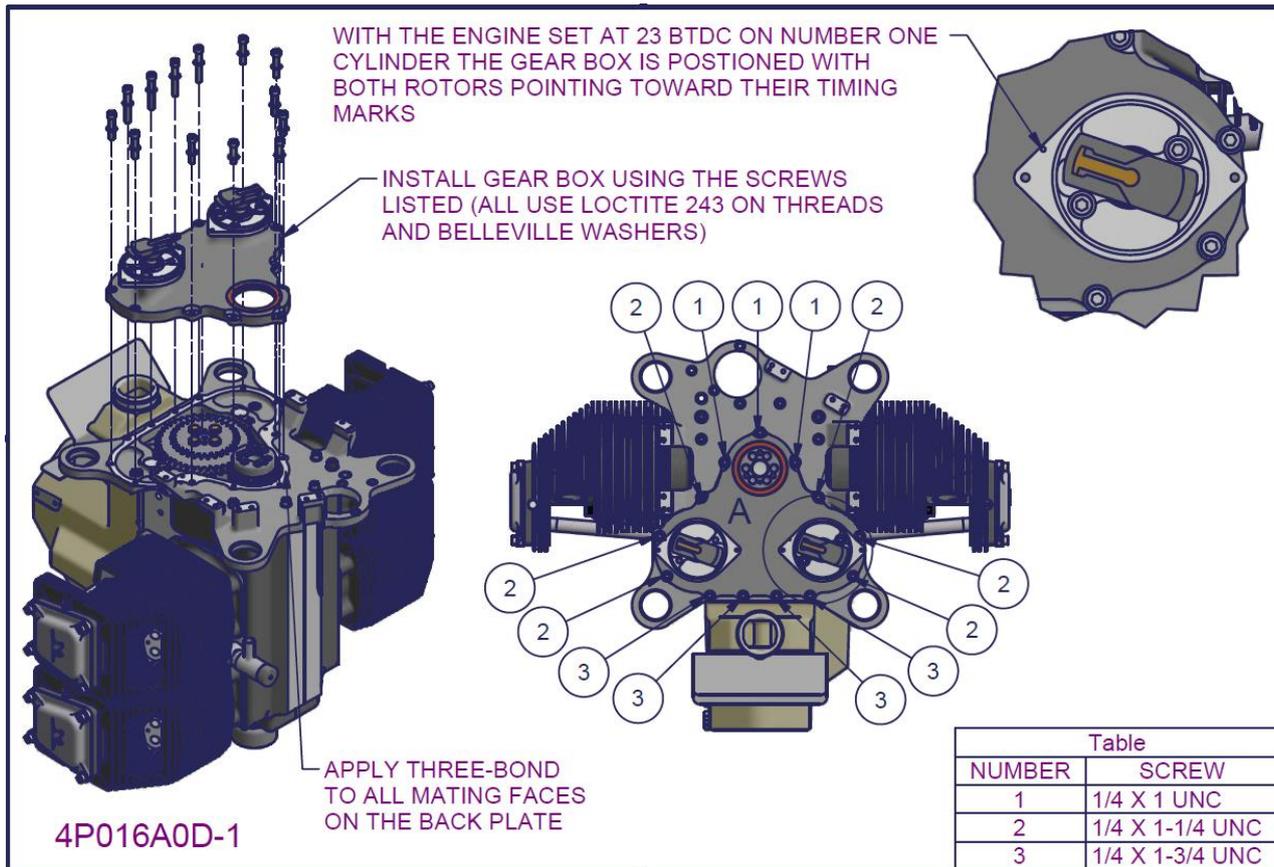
2200/3300 back plate and distributor gearbox installation 3
